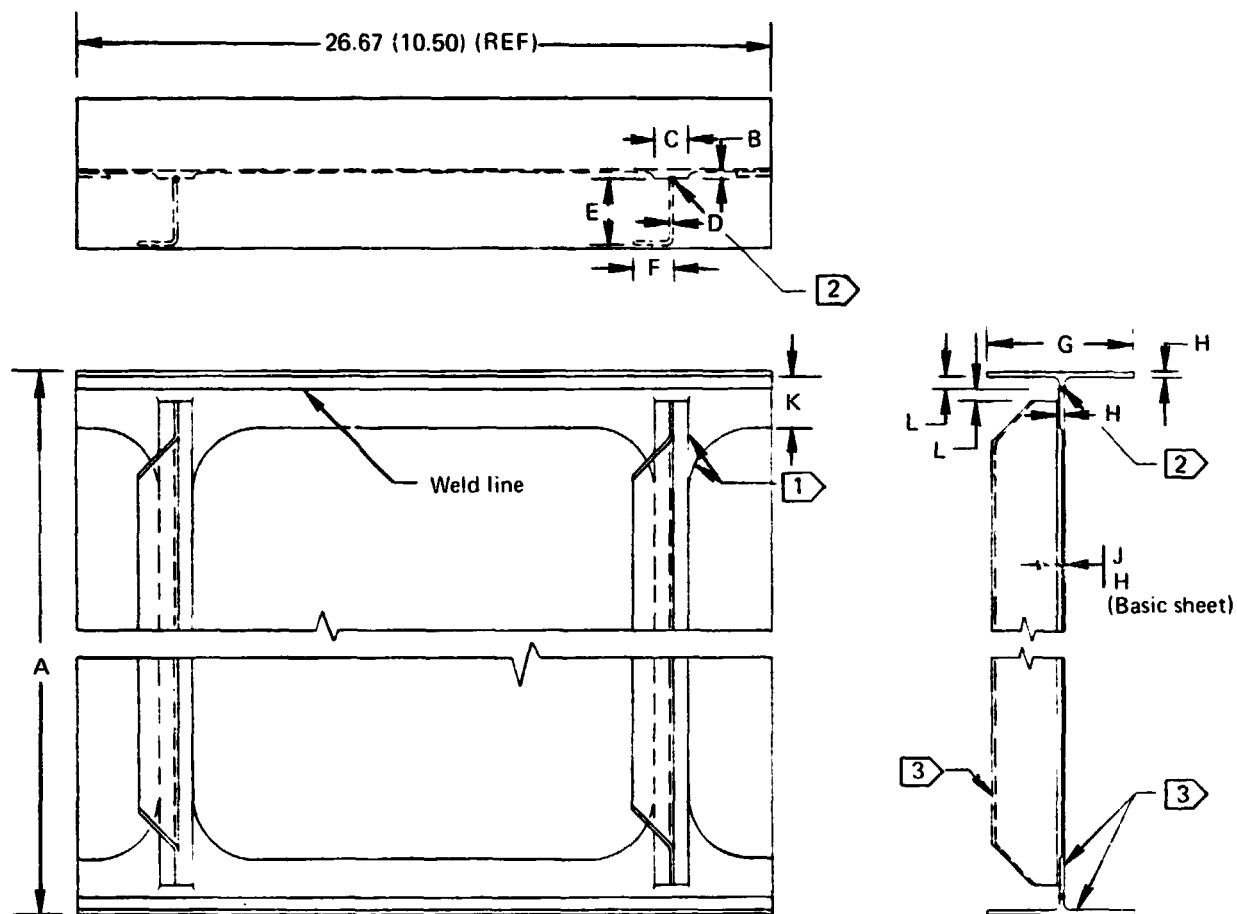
WING SKIN PANEL—INTEGRALLY MACHINED AND WELDED—SHEET STIFFENER
